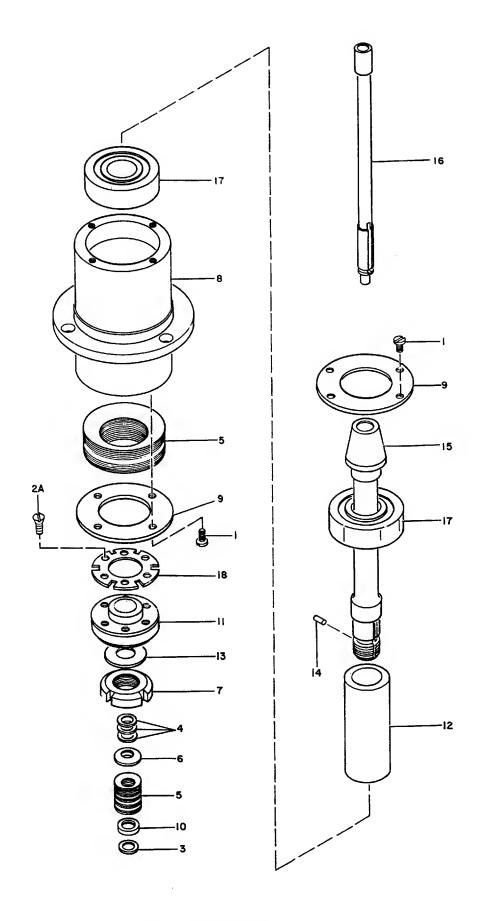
DISK PACK SPINDLE ASSEMBLY. SEE LIST 7.
